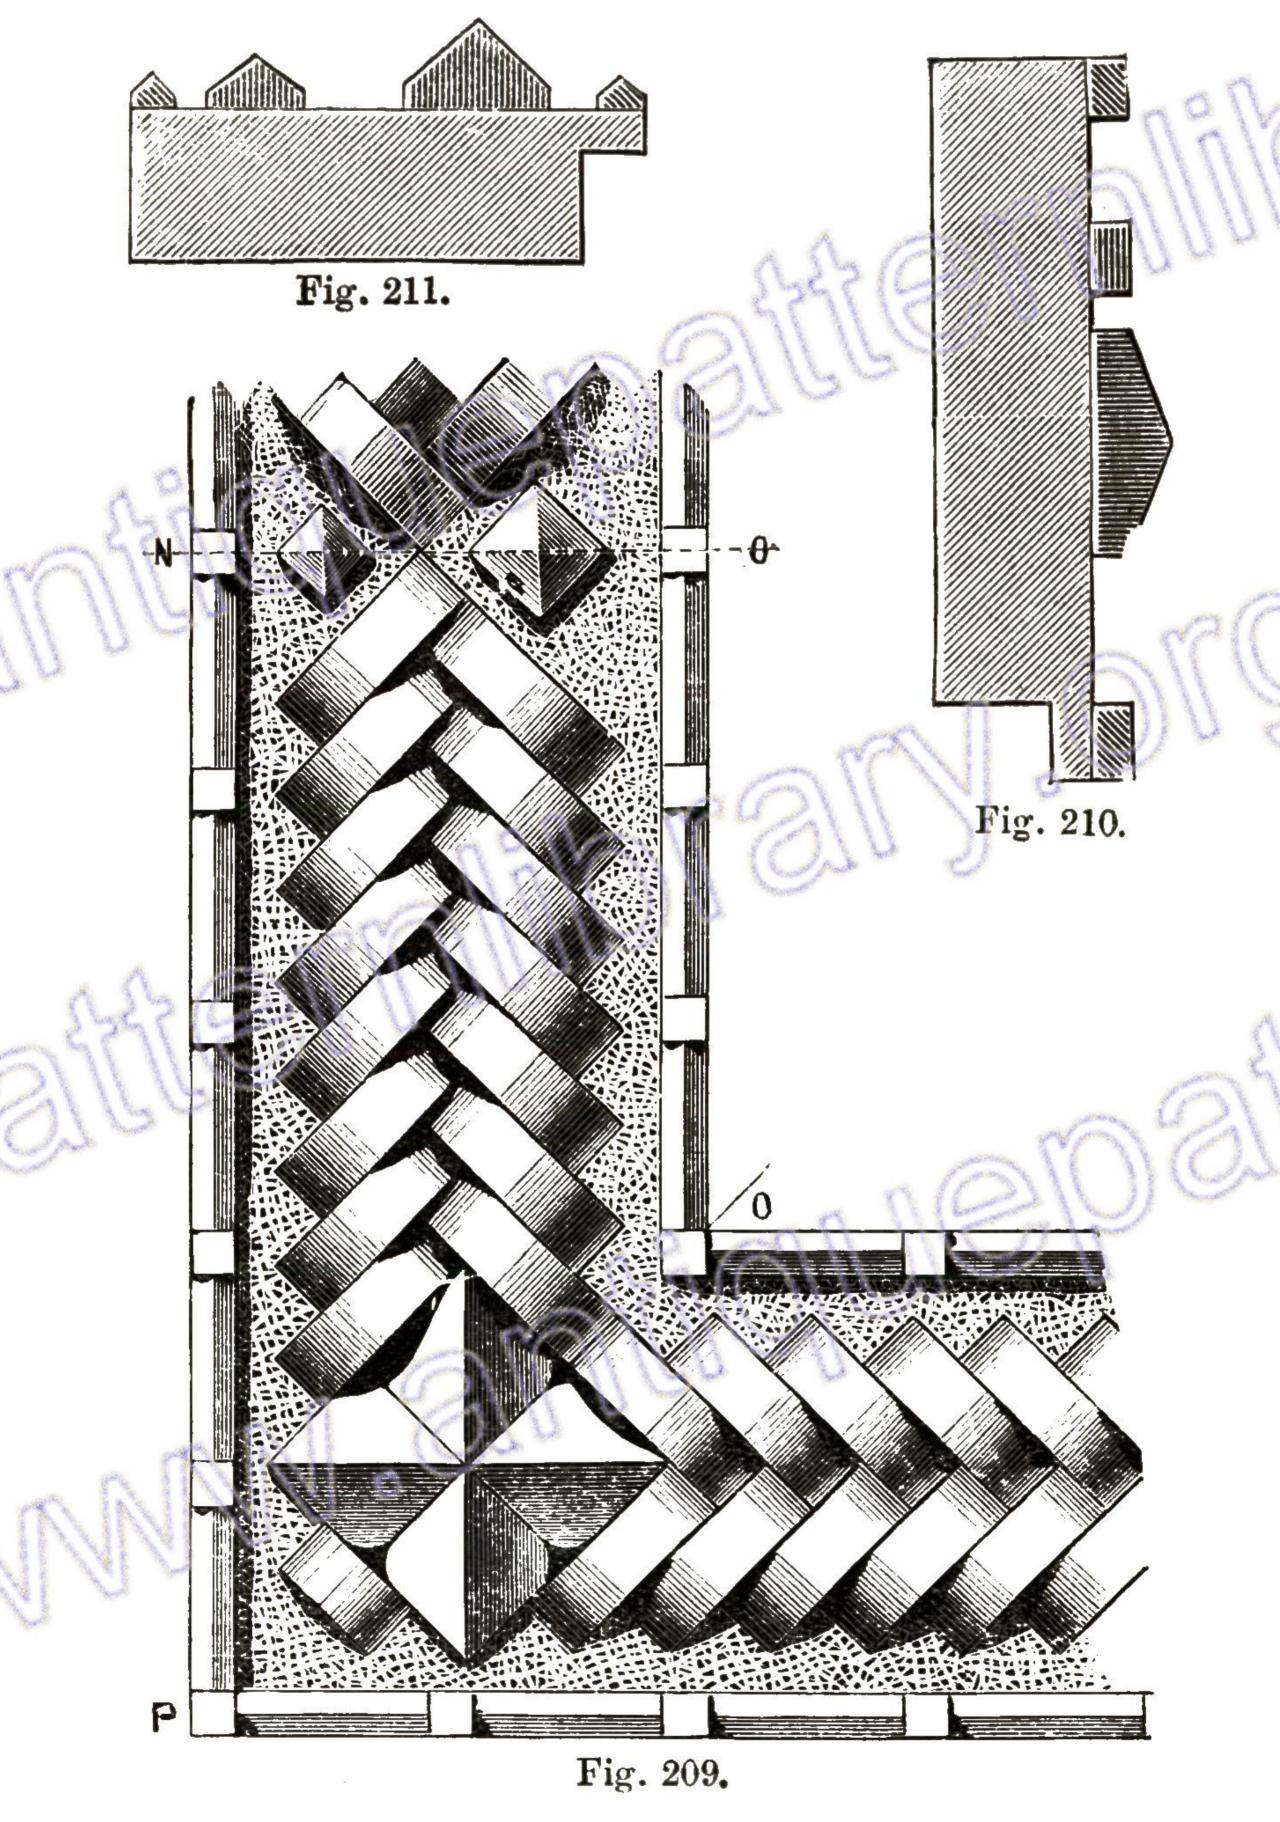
Design for Cork Frame; Fig. 210.—Section on Line PQ; Fig. 211.—Section on Line NO.
